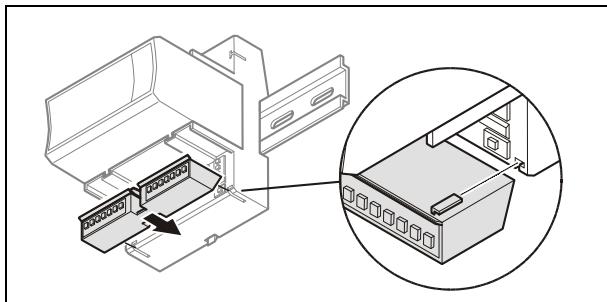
Mounting the auxiliary terminal package onto the terminal socket / mixed I/O module
